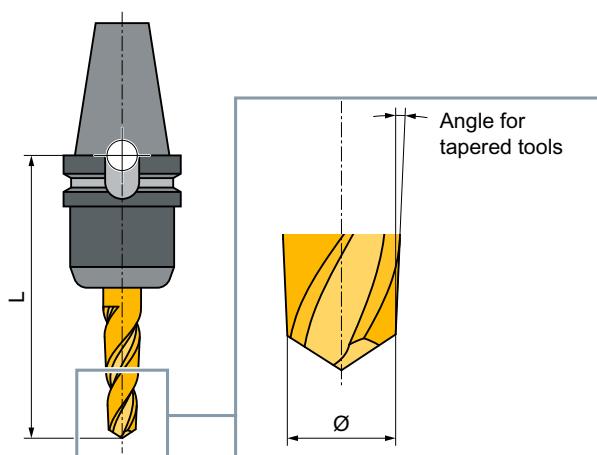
3D tool type with an example of a bevel cutter (Type 155)
